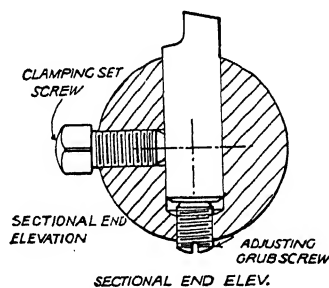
Single-ended Cutter adjusted with Grub-screw
